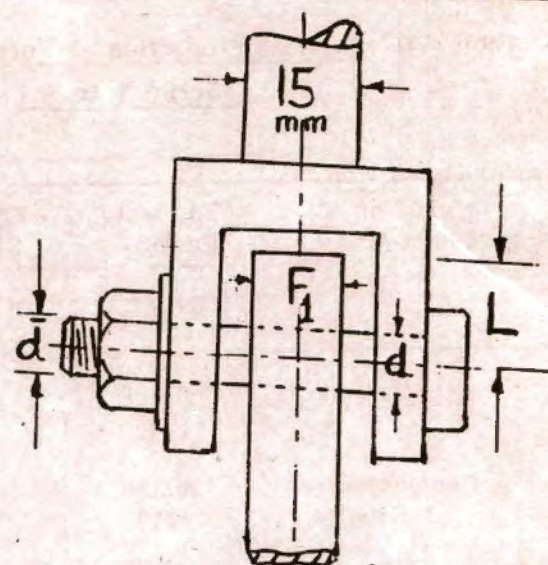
FIG. III LOAD APPLICATOR FOR DOUBLE SHEAR TEST OF TIMBER SPECIMEN
